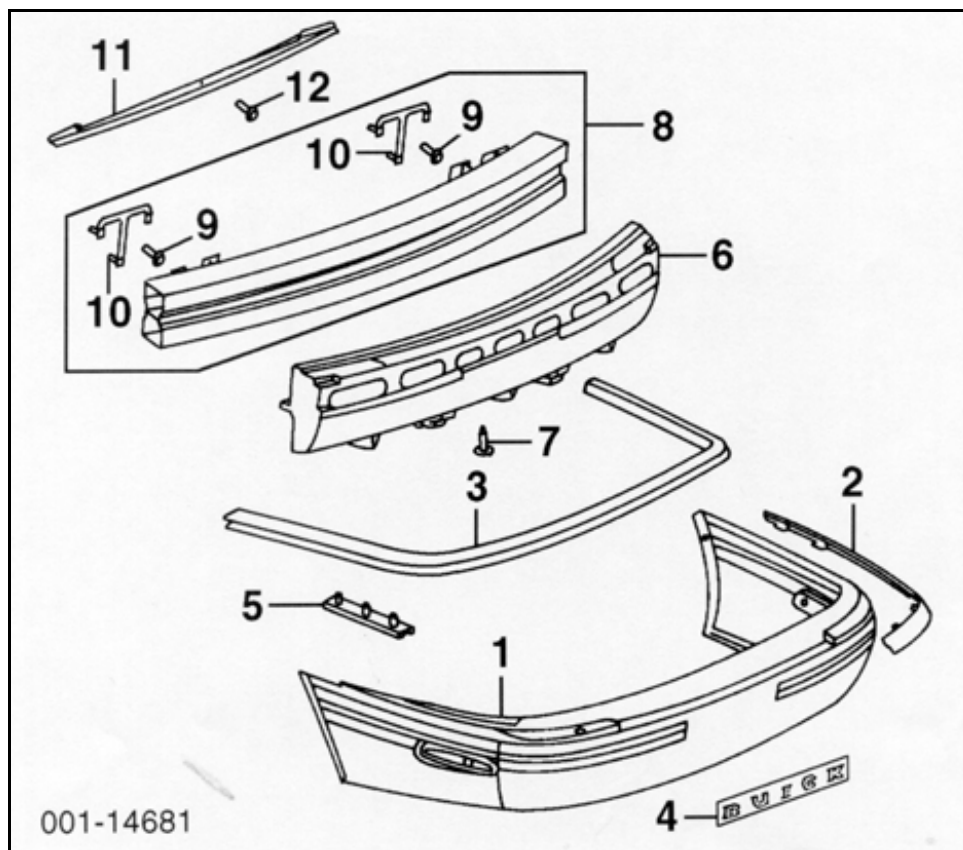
1998 Buick Park Avenue Rear Bumper Construction
